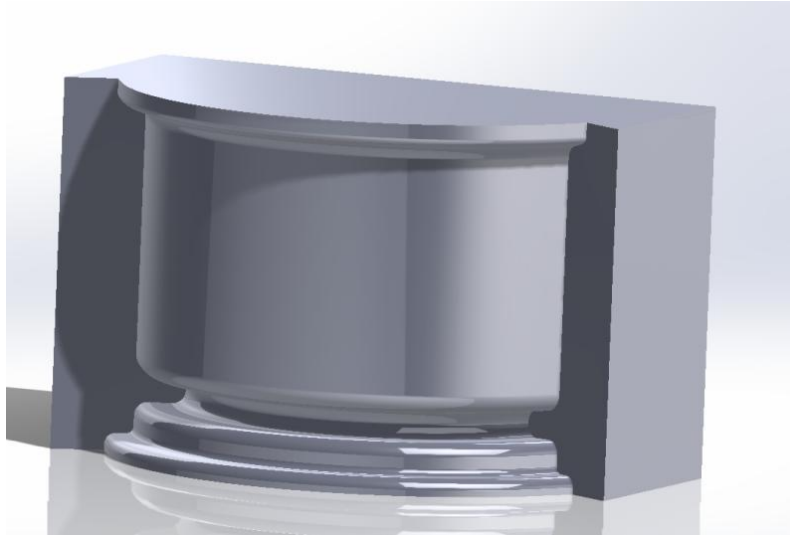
Rim Mold Plug Model Without Outer End Plate Installed
